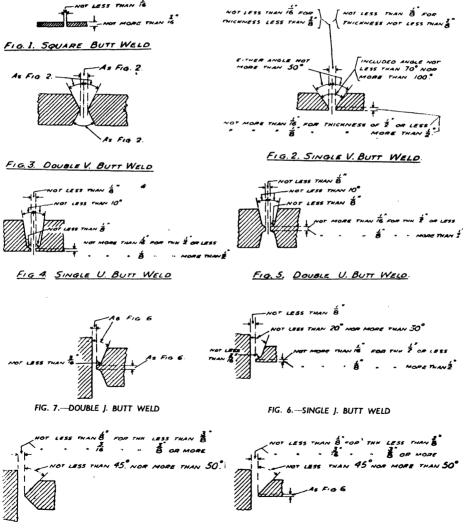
DOUBLE BEVEL BUTT WELD
